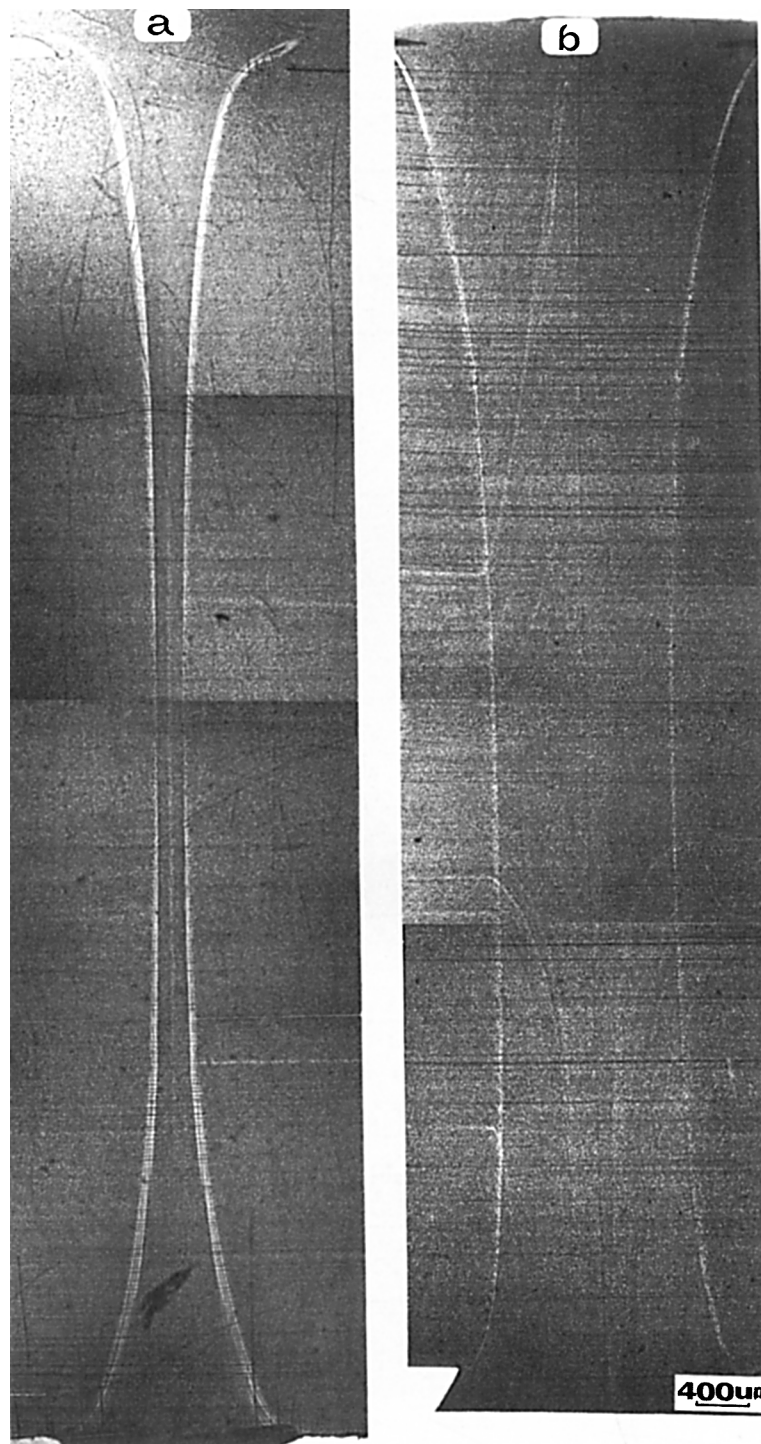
Butt fusion zone at two weld pressures: (a) 1.61 MPa; (b) 0.31 MPa.
